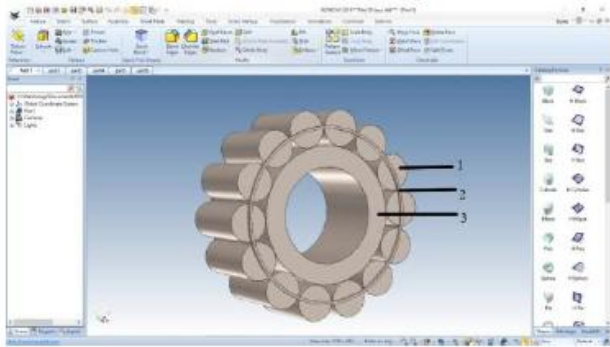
Roller Bearing 1- Cylindrical rollers
